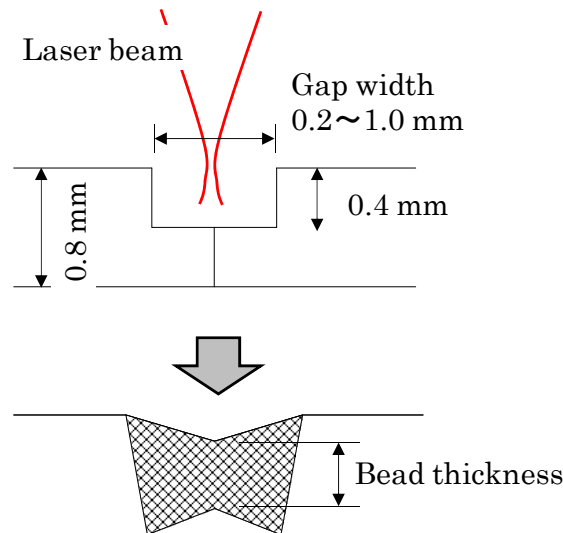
Employed groove to make under-fill weld beads
